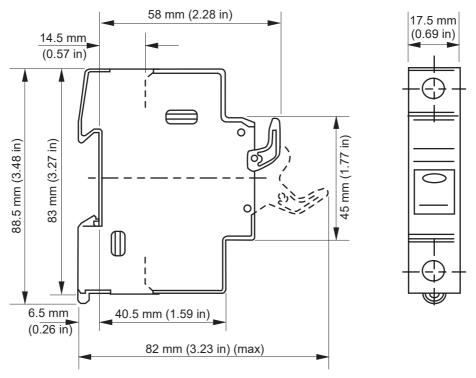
Fuse holder dimensions: US101 (10x38mm)
